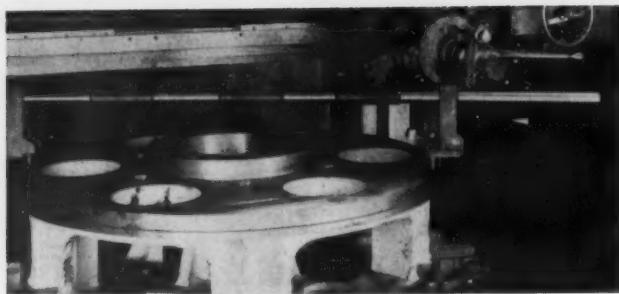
This view shows a gage—longer than a man is tall—which is used to measure shallow inside and outside diameters while the work is still on the bed of the machine.
